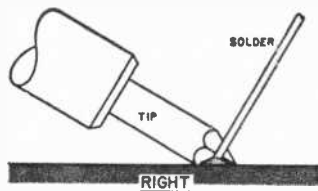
Good soldering technique calls for the solder to be applied at the junction of the tip of the soldering iron and the joint to be soldered.
